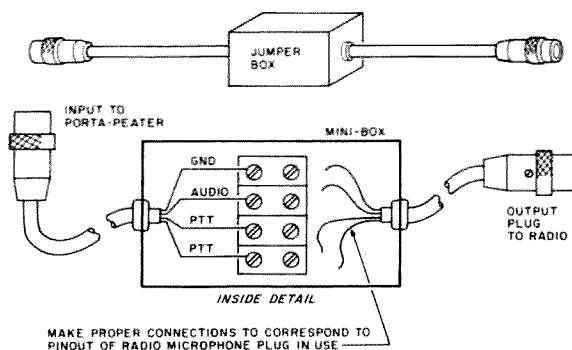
A jumper box will solve the problem of a fistful of audio cables. Use shielded box and cables only.
